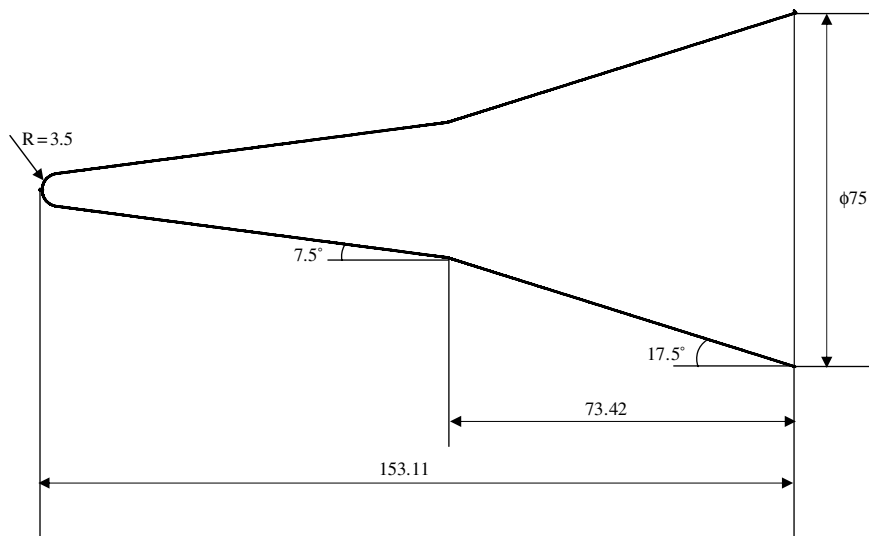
Geometry of the cone–flare model (linear dimensions in mm).
